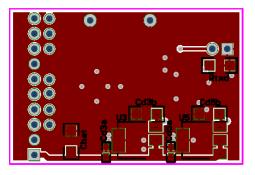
CAN EVB PCB Bottom Drawing (Bottom View)
